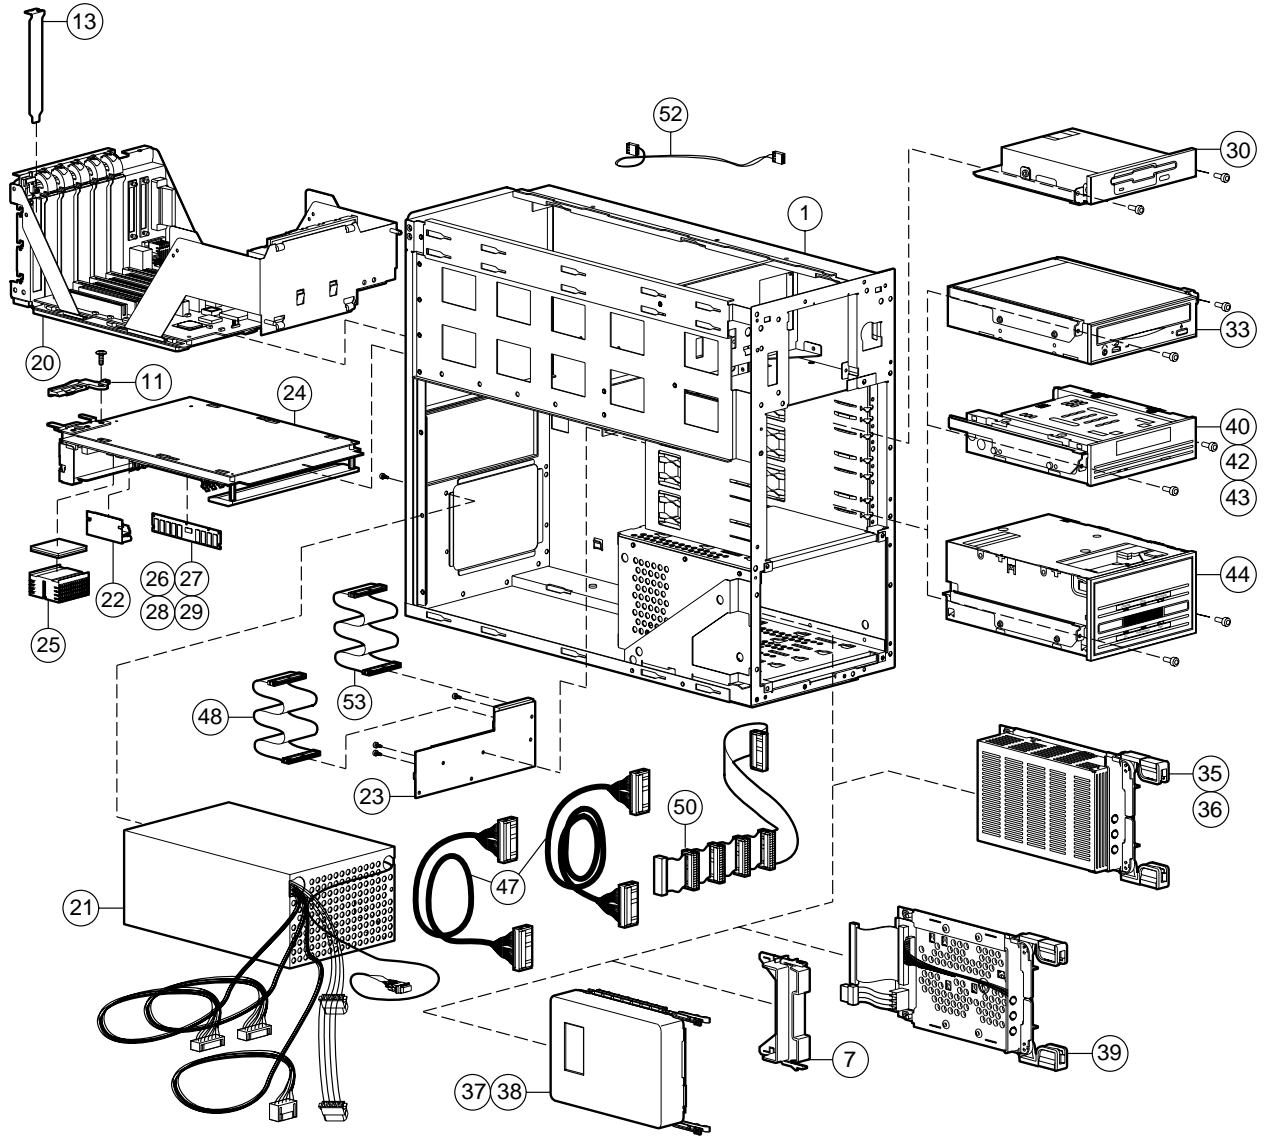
Exploded View of the Compaq ProLiant 2500 and 2500R Server System Components
